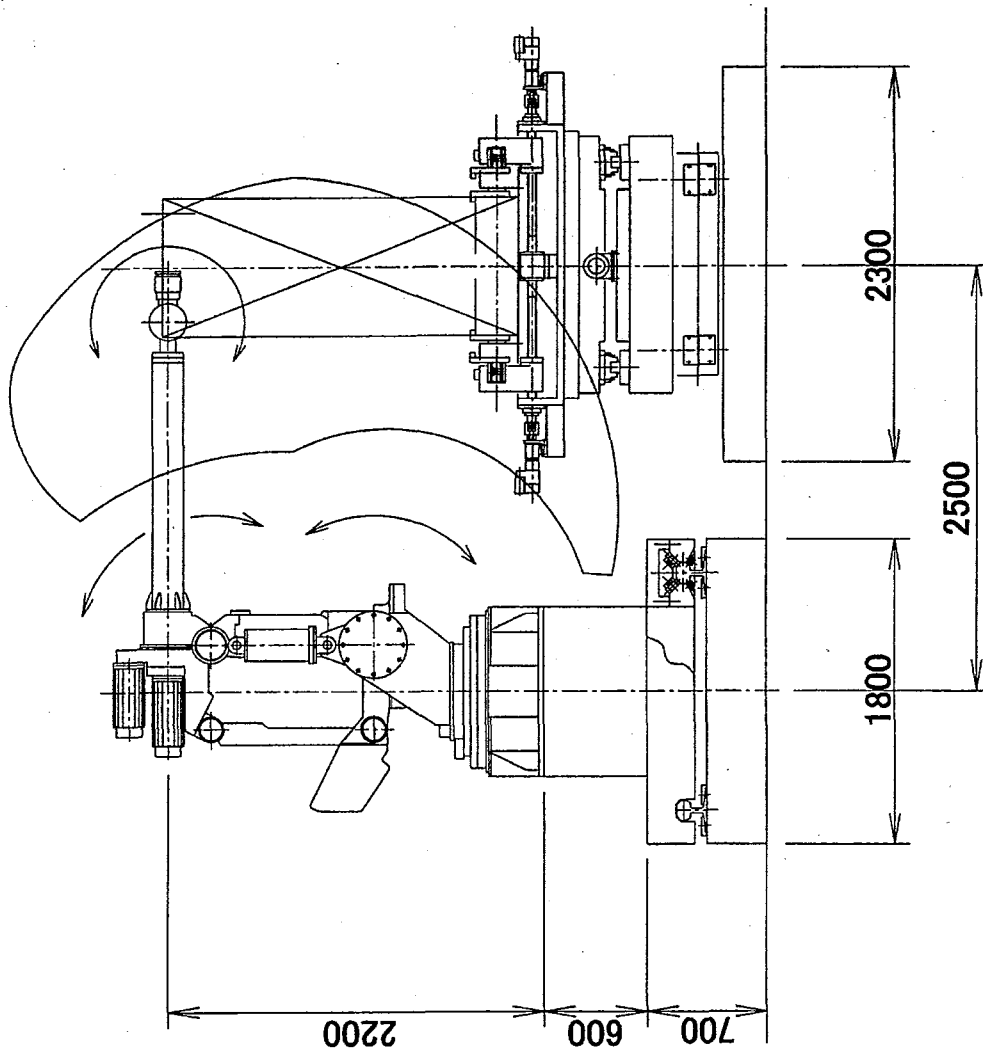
Mechanism concept of light work robot with end-effector for access repairing positions for pipe welding/cutting
